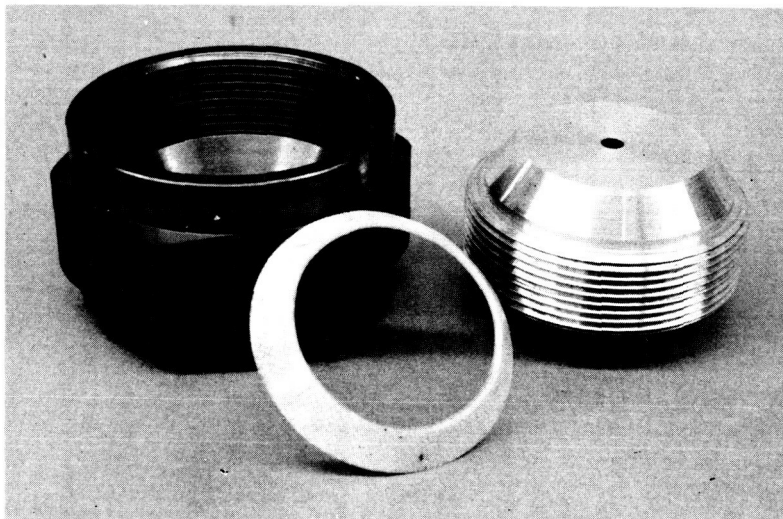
Lip Seal Leak Test Fixture and Sample Lip Seal
